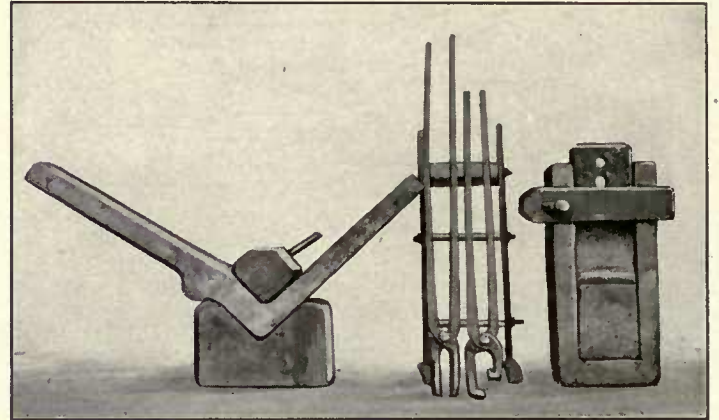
Tools for Forging Rod Straps Under a Steam Hammer.
